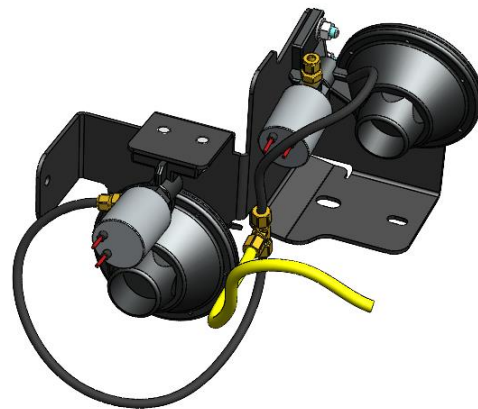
JT220 Horn Driver Prewire and T-Fitting
